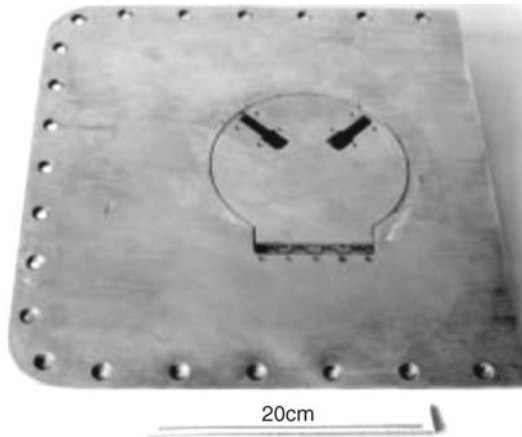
Outer surface of wing panel and door after paint stripping and removal of catches¹
